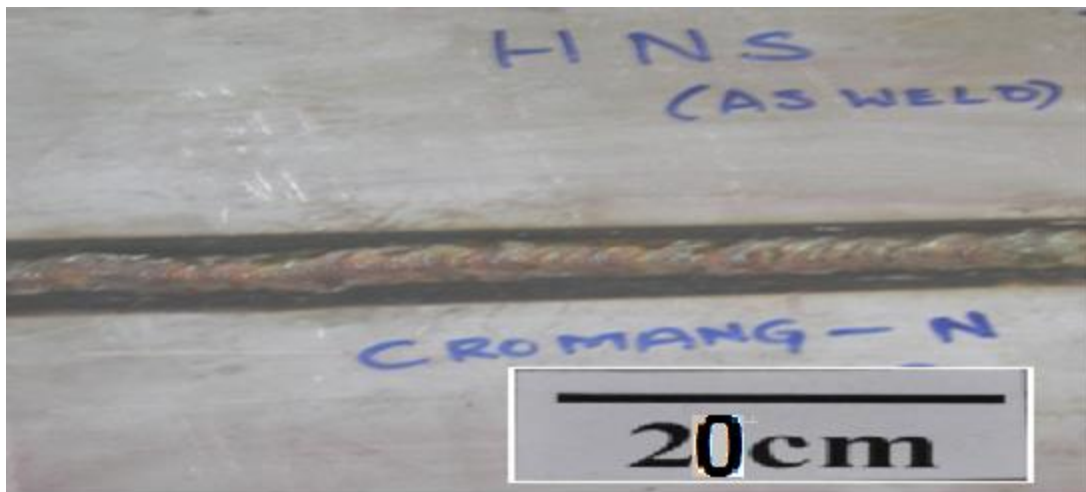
Shielded metal arc weld joint of high nitrogen steel
